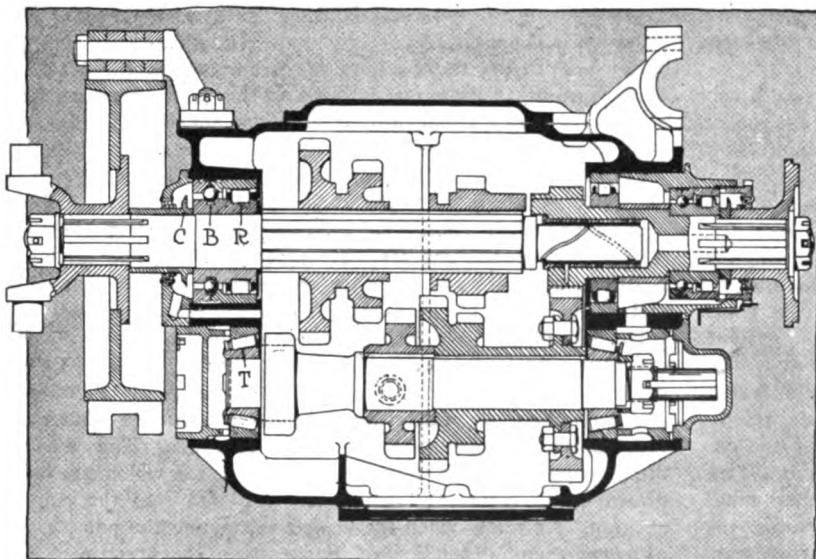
Wolseley gearbox for 16-20-horsepower car
